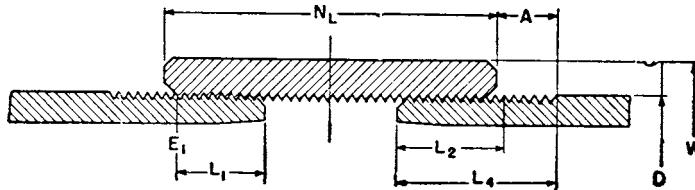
Dimensions of Hand Tight Assembly for Use with Table X3.2
